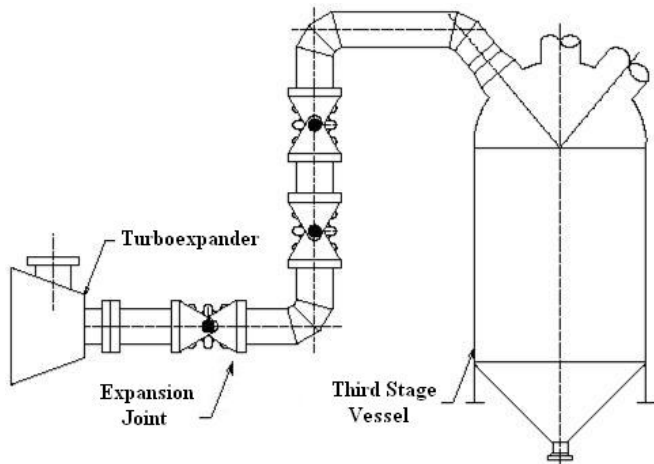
Schematically drawn of a turboexpander inlet line ideal lay-out [3].
